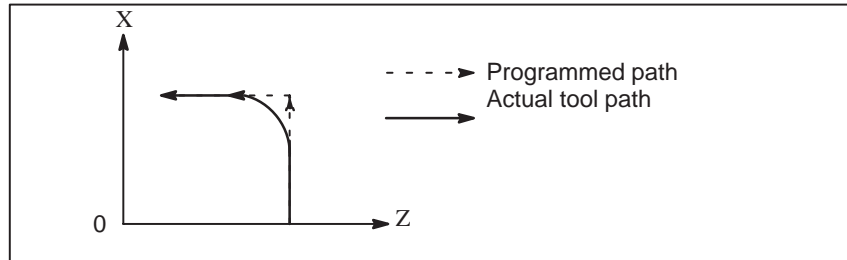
(b) Example of Tool Path between Two Blocks
